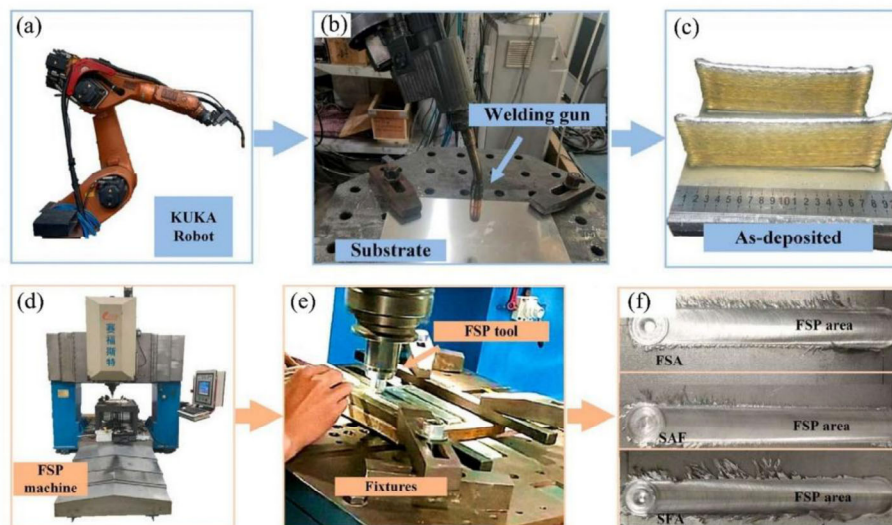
Process chain of WAAM followed by interlayer FSP: (a) robotic deposition system; (b) welding gun positioning during WAAM; (c) resulting as-deposited Al-Cu wall structures; (d) dedicated FSP machine; (e) tool and fixture arrangement for post-deposition stirring; (f) comparison of FSP-processed surface regions. Reprinted with permission from Elsevier [32].
